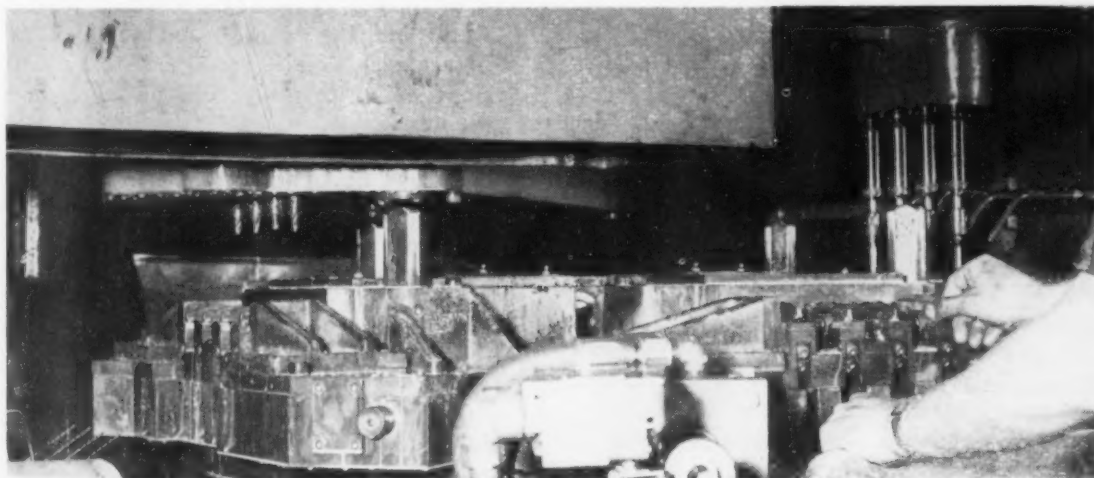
Buhr machine with 4-plate fixture which automatically indexes parts to machine's four stations for drilling and tapping of oil and adjusting screw holes.
